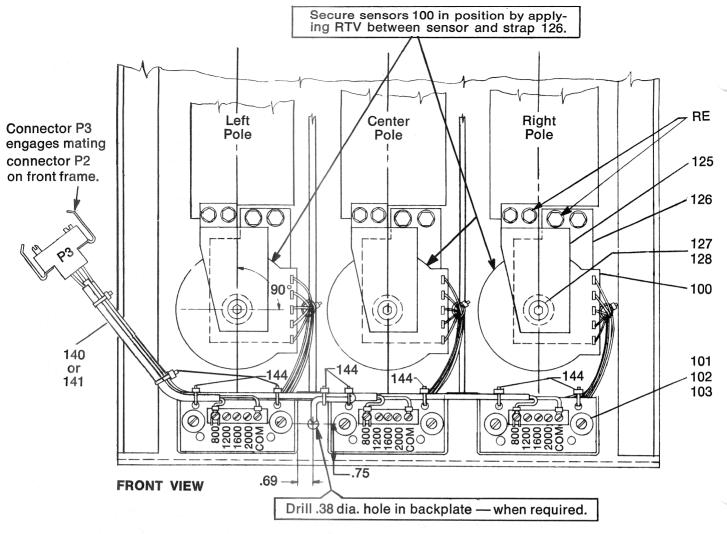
Converted back frame showing SST sensors, terminal boards and harness.
